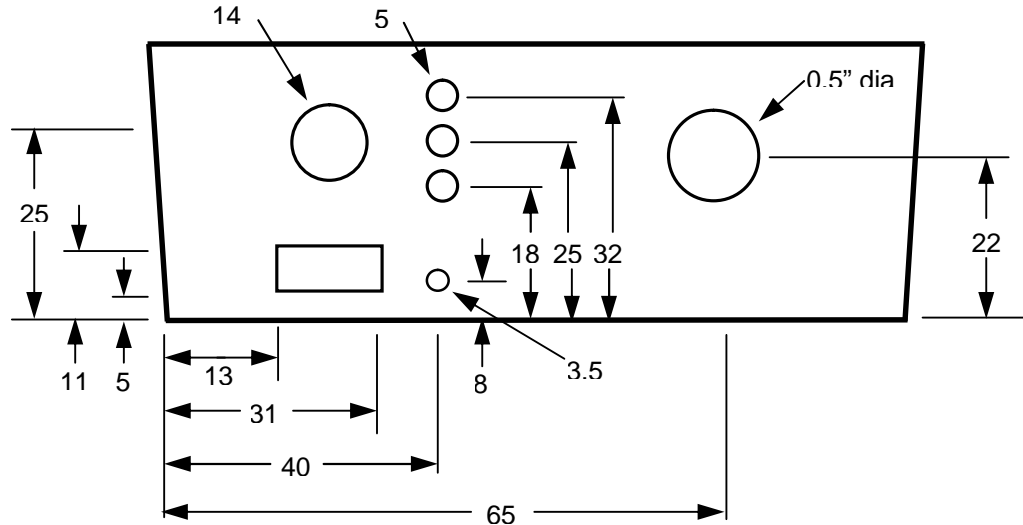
1590Y Enclosure PA RF O/P & Supply Side
